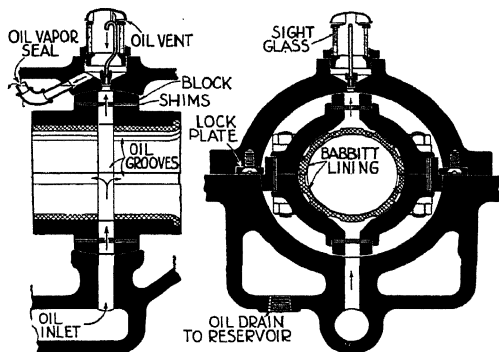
Another design of a main bearing for a large turbine. (Courtesy Socony-Vacuum Oil Co.)
